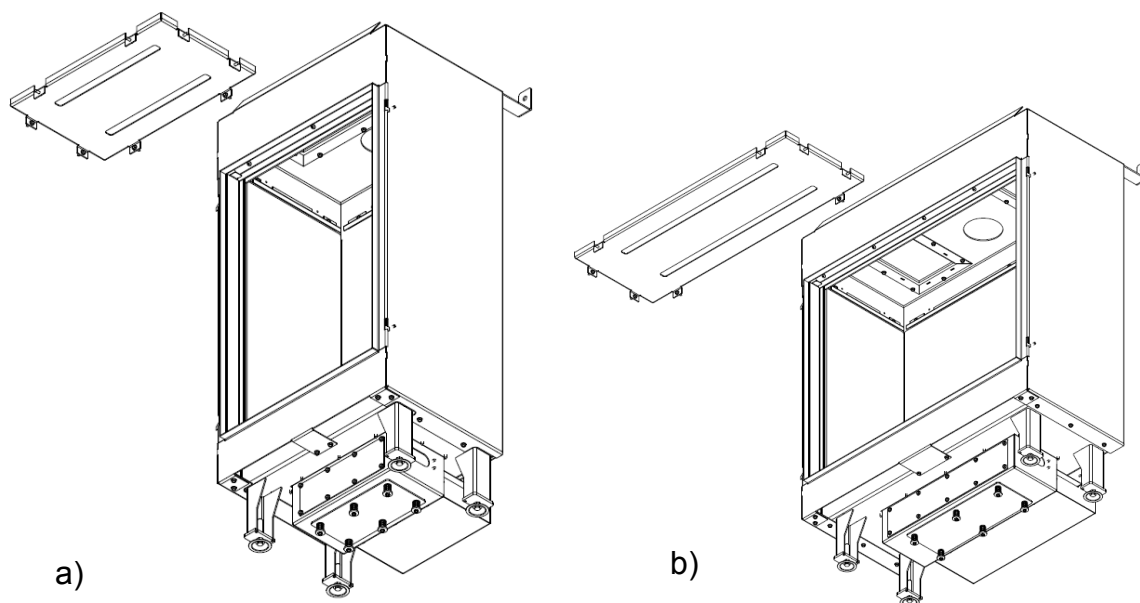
Disassembly of deflectors: a) LEO45 / 68, b) LEO76 / 62
